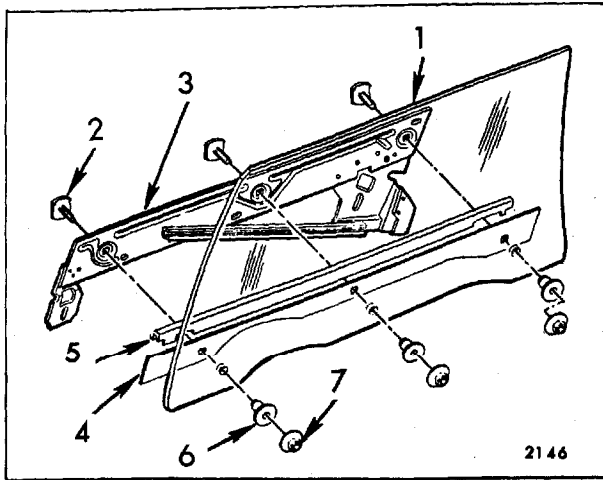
Front Door Window Assembly - All "37-39-47-57 and 67" and "C-69" Styles
